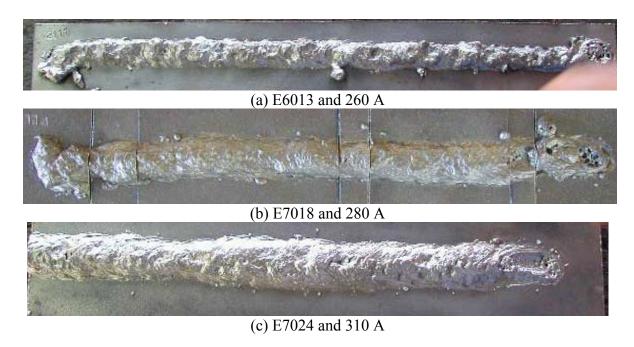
Pictures of the bead-on-plate wet welds deposited with the three electrode types with electrode negative on A572 Gr. 50 steel plates at 50 m.
